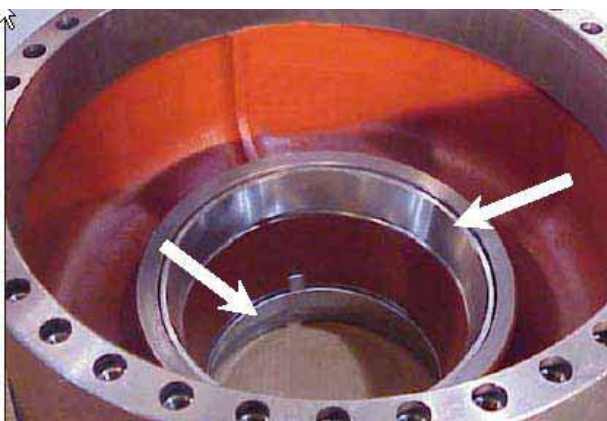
Using a 0.002 in. feeler gage, check that the bearing cups are seated against the shoulder. When cup is seated, feeler gage should not fit between cup and hub shoulder. Check in several locations.
